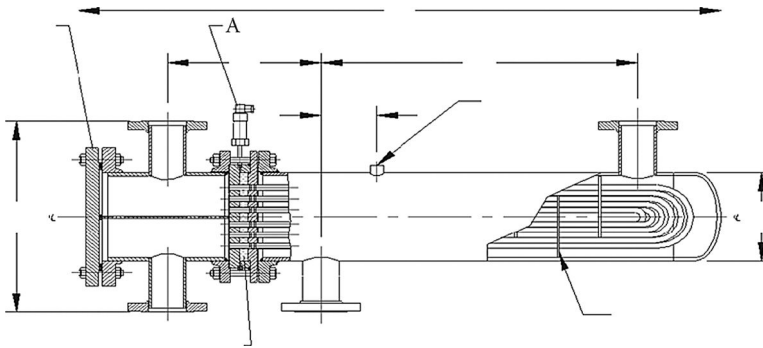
Double tubesheet shell and tube heat exchanger with real-time leak indicator (A). (Courtesy of Alstrom Corporation, Bronx, NY.)
